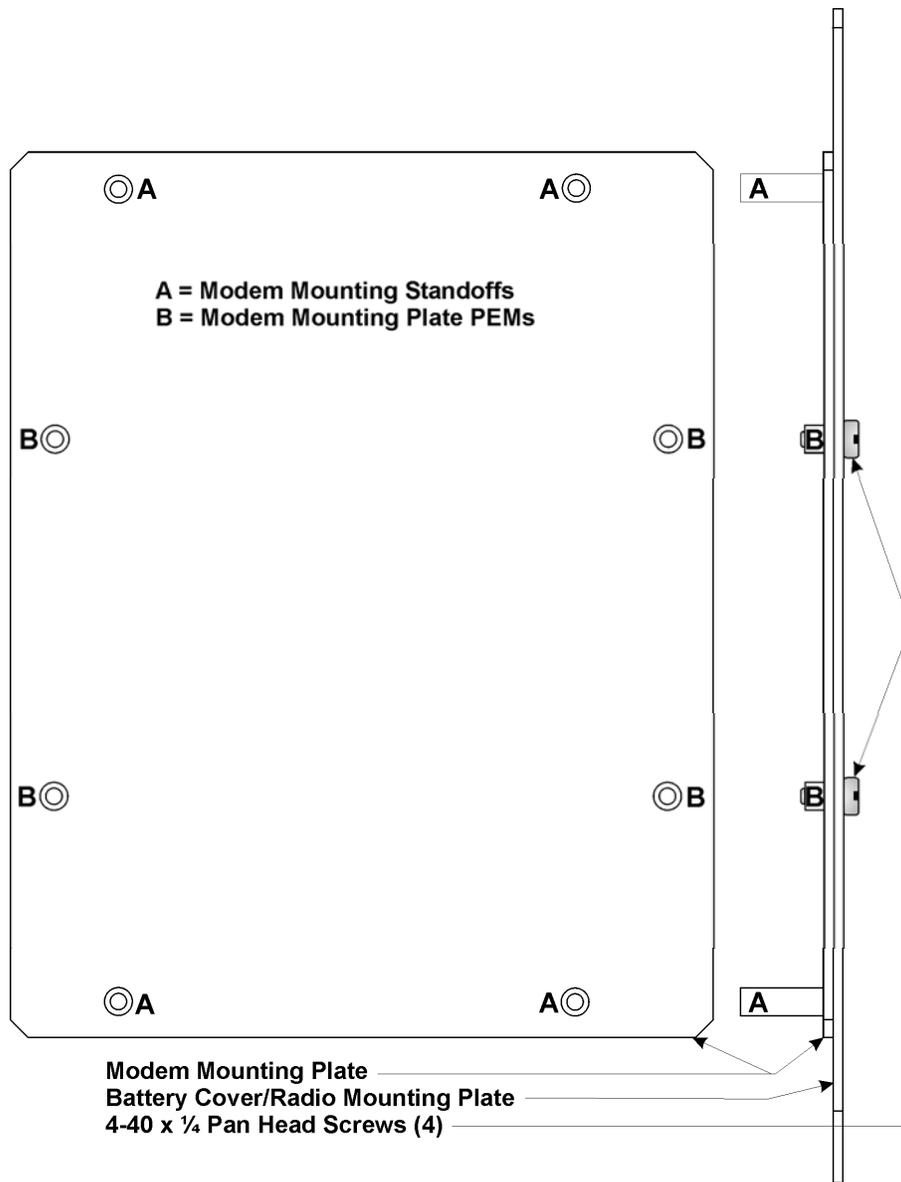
Modem Mounting Plate and Battery Cover/Radio Mounting Plate (GFC, Corrector, EPAC)
